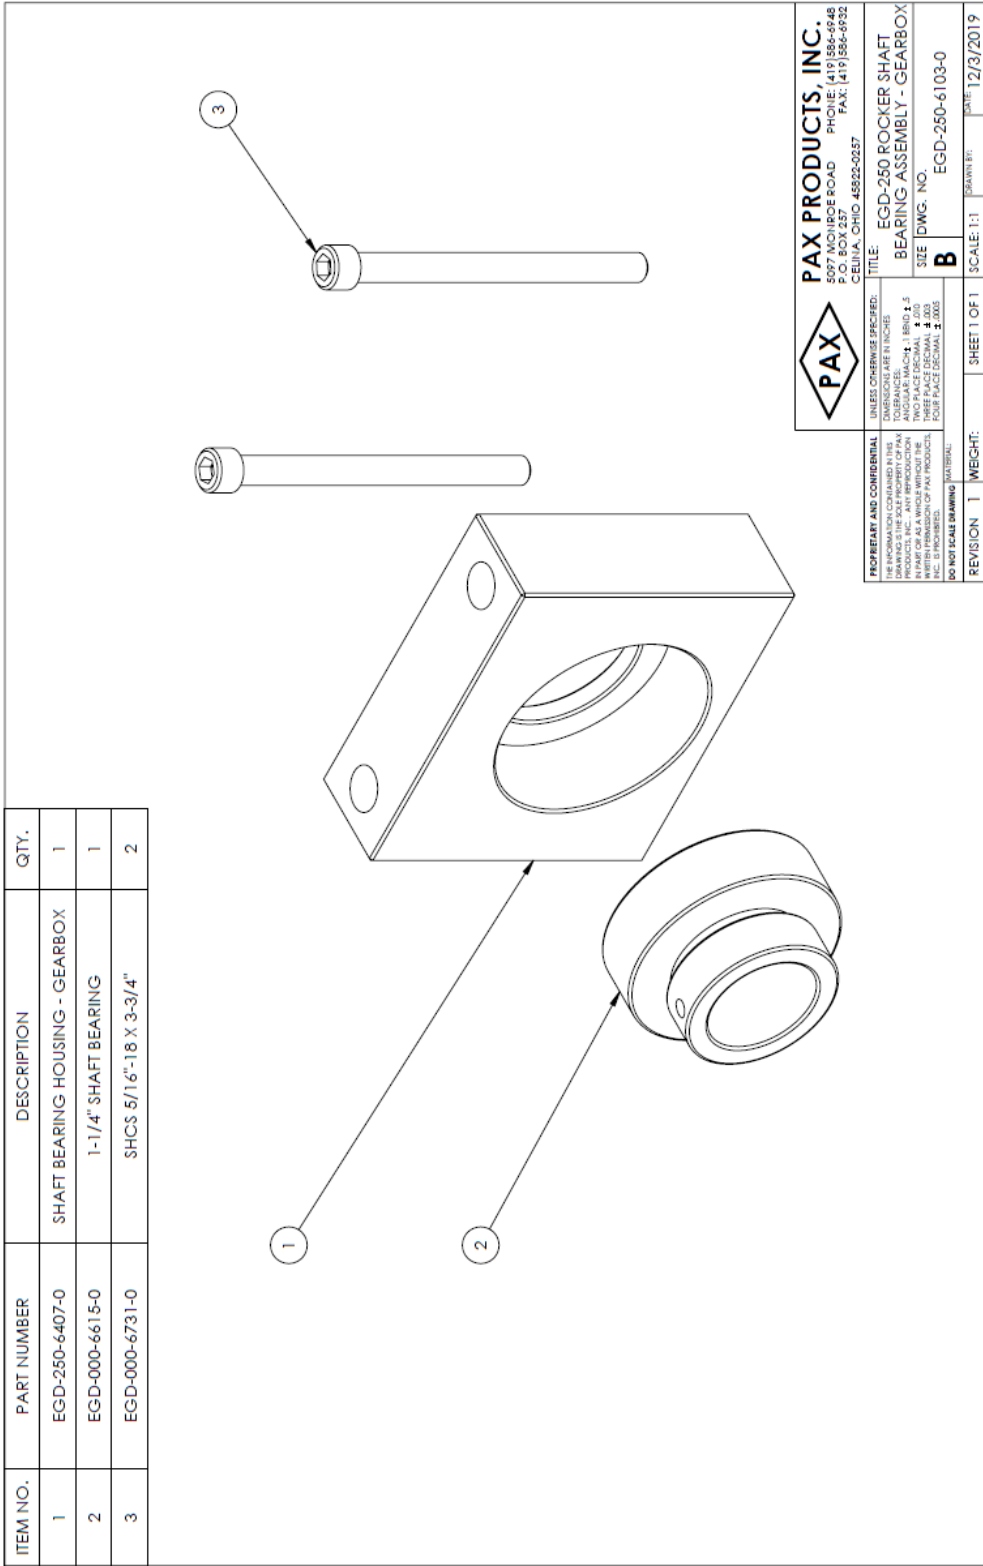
EGD-250 ROCKER SHAFT BEARING ASSEMBLY - GEARBOX
